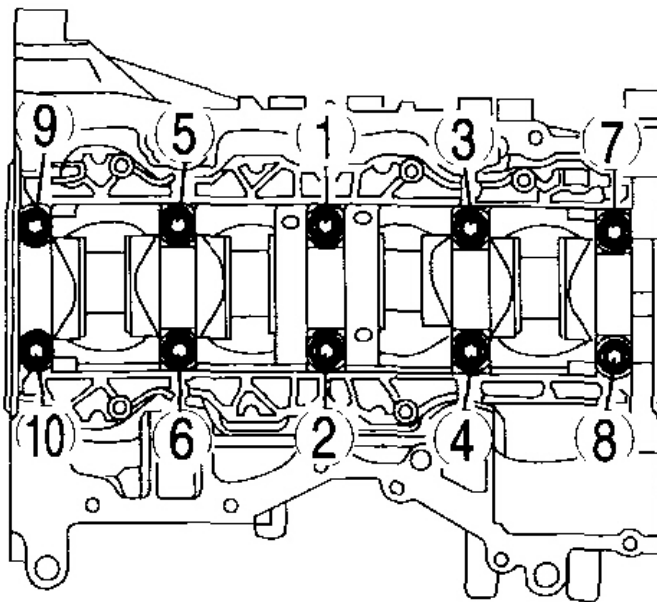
Assembling Cylinder Block (I) & Torque Specification
